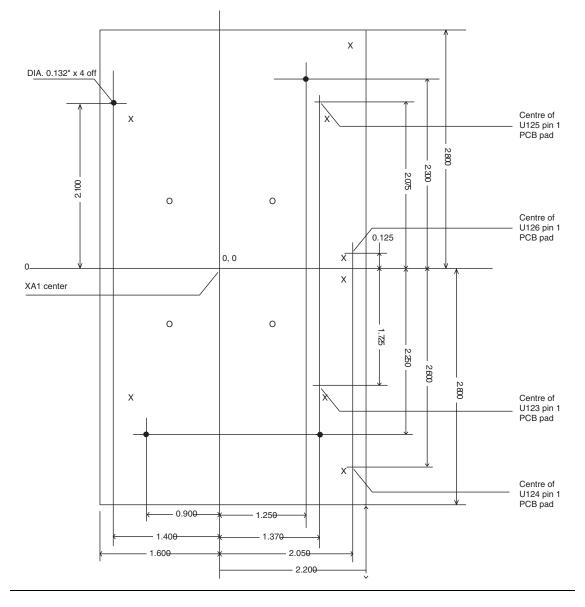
Mechanical Diagram of the EPXA10 Development Board Expansion Headers
